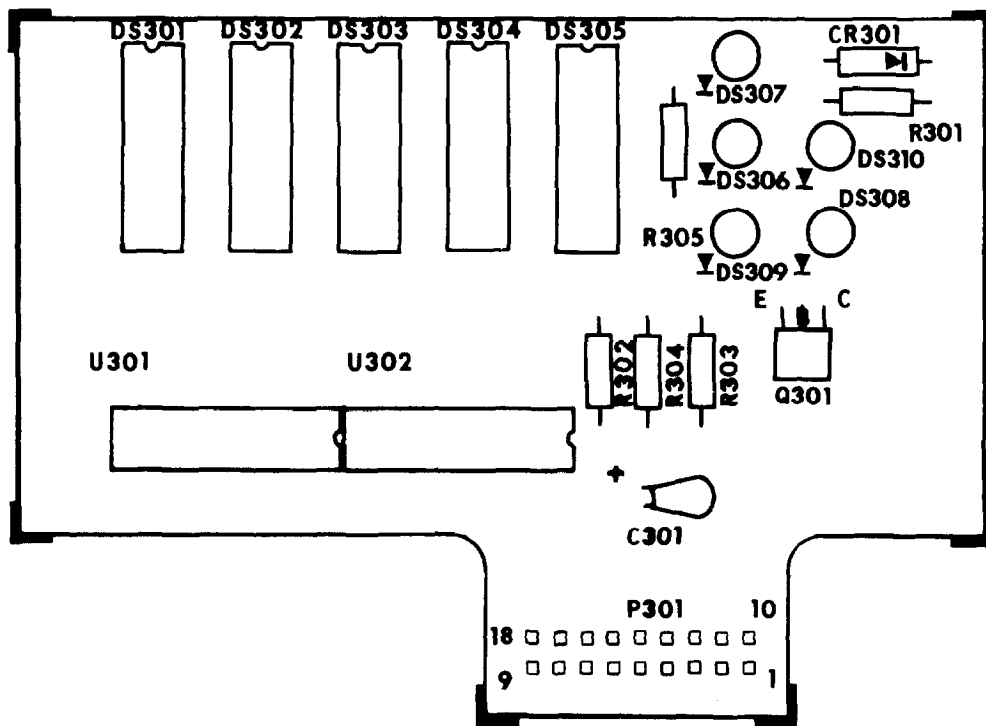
A1A1 8920A/8921A Display PCB Assembly
